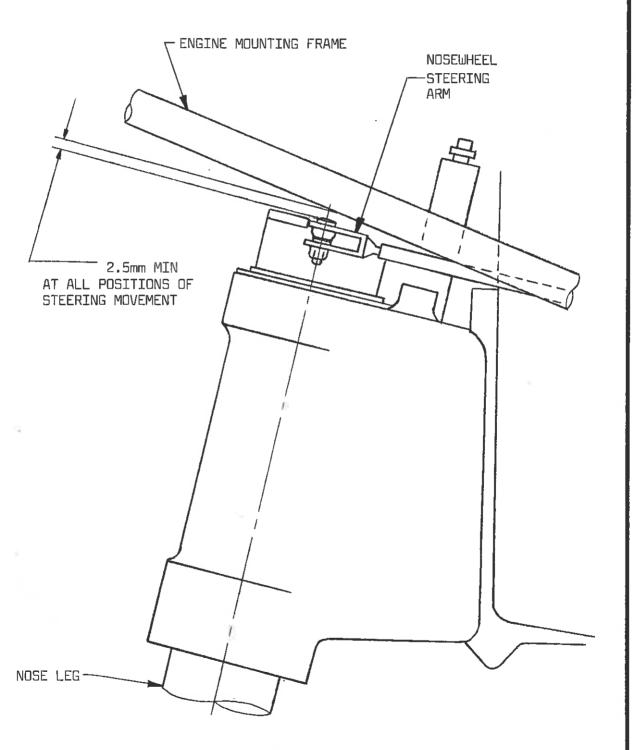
NOSE U/C AND ENGINE MOUNTING FRAME
